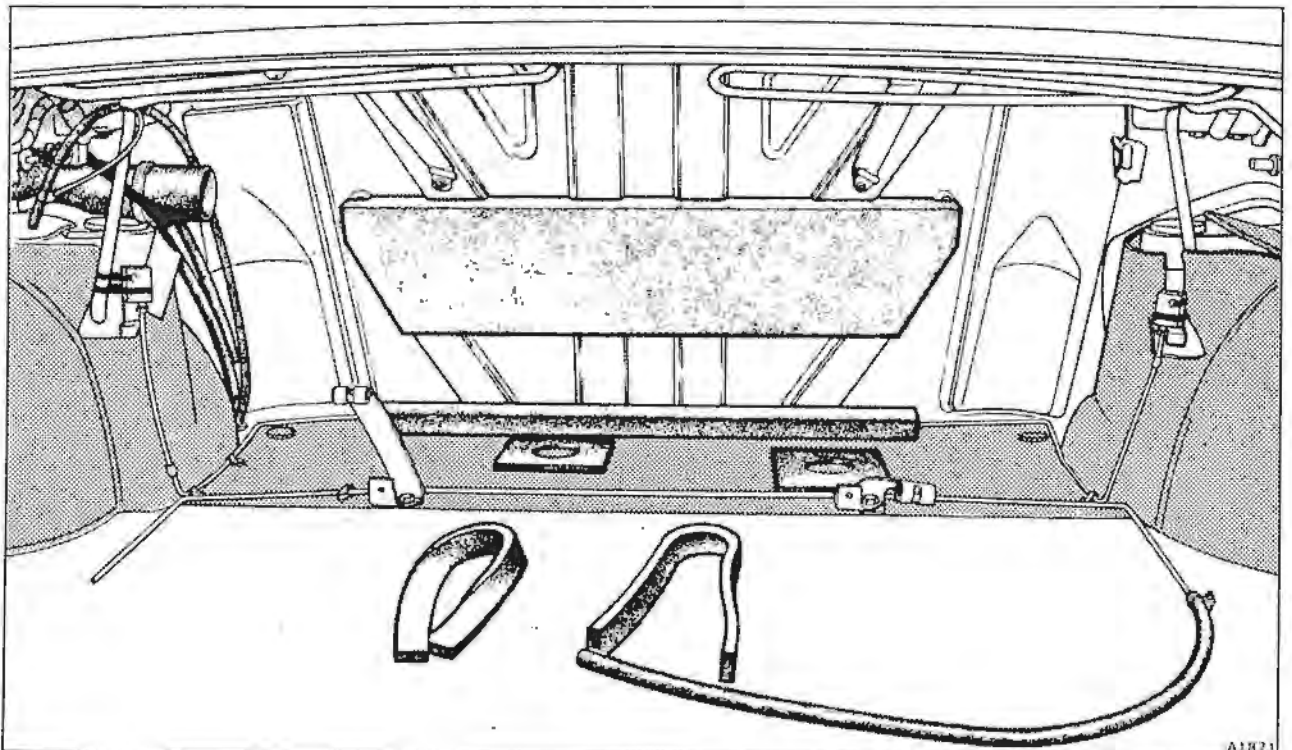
Fuel tank mounting pads and straps (4 door cars)
